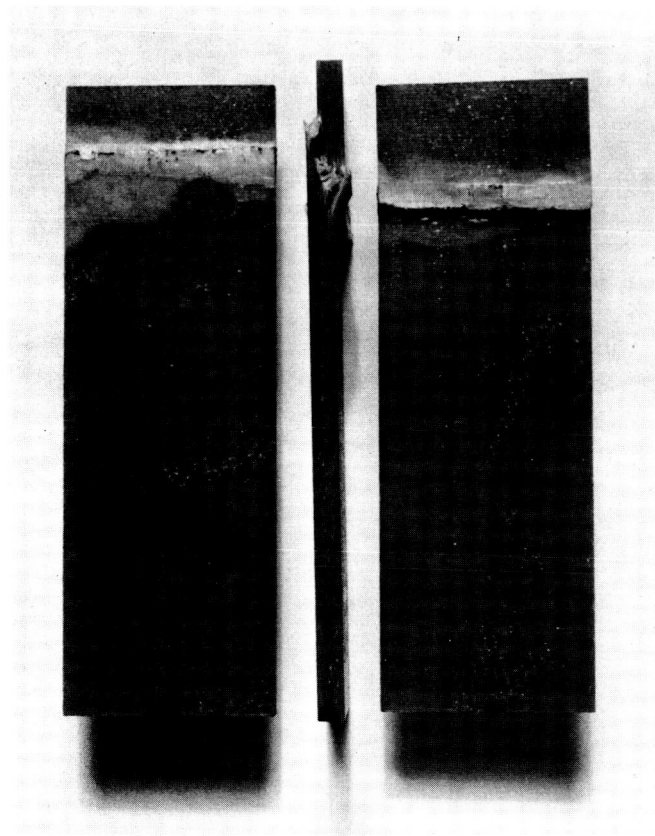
Three Compressive Test Specimens of the Upper Sandwich Doubler after Testing
